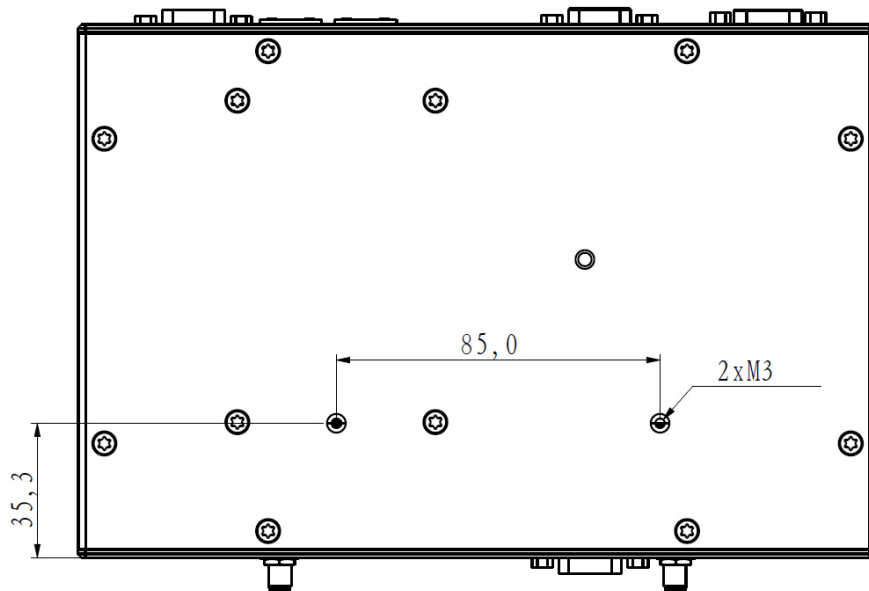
Tapped holes at the bottom of the KBox for fixing the DIN Rail mounting clip
